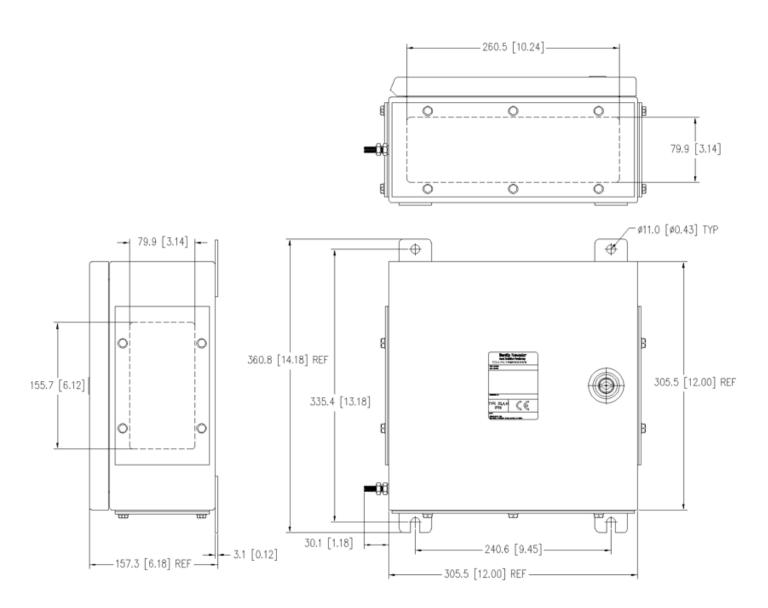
175751 3300 XL Multi-Purpose Housing Dimensions (12" x 12" x 6")
